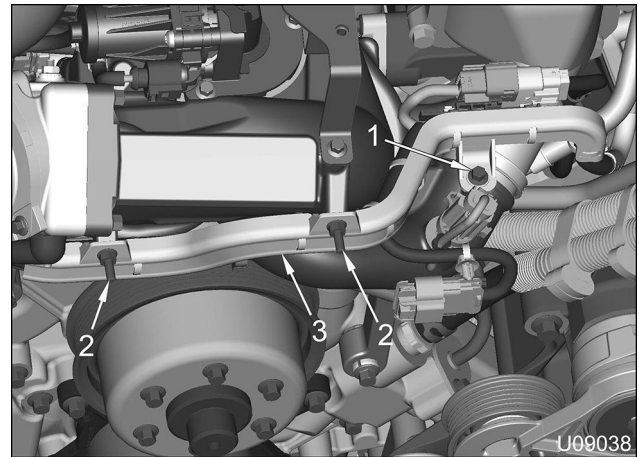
Engine Harness to Injector Hose Assembly and Tie Straps to Left Valve Cover
